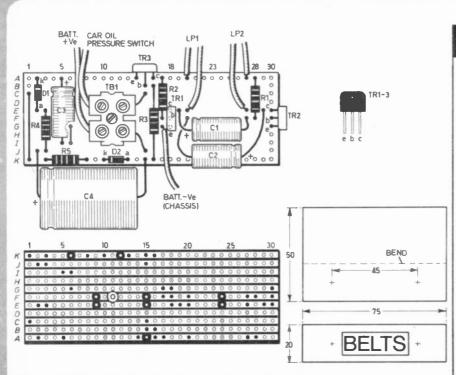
Stripboard layout for the negative earth version. Bottom view shows the track breaks on the underside. The leads from C1 and C2 must not touch and should be sleeved.
